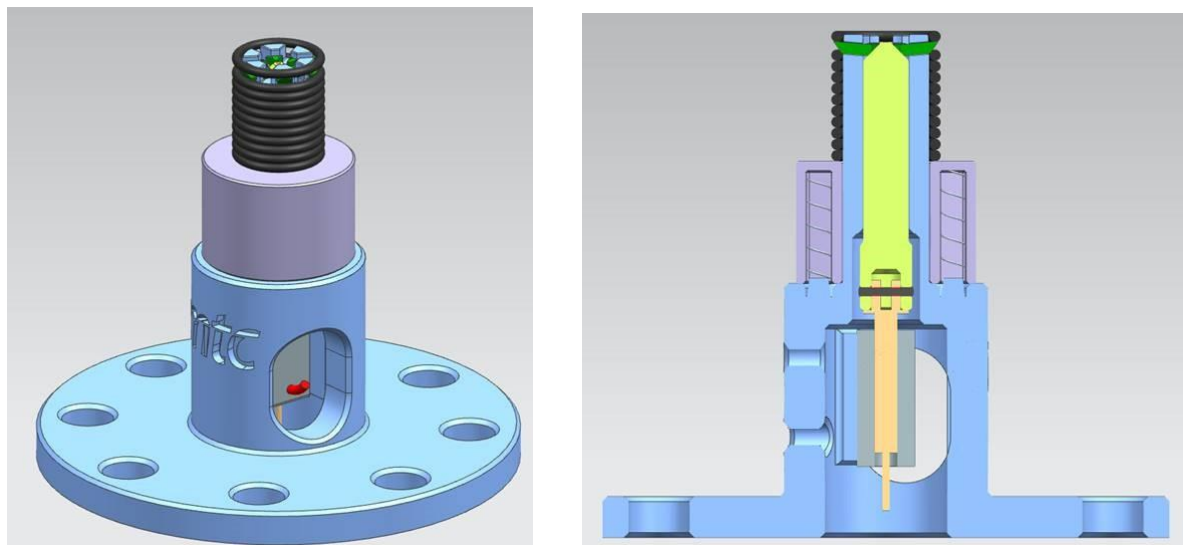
O-ring Dispenser Prototype (left) and O-ring Dispenser Sectional View (right)
